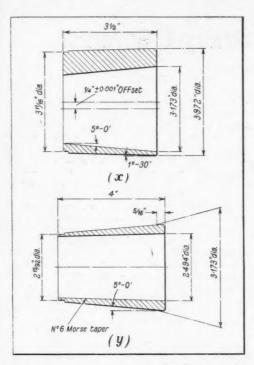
A shaft component A and a mating sleeve B which were required to be machined to an accuracy of 0.0002 in. for eccentricity.
